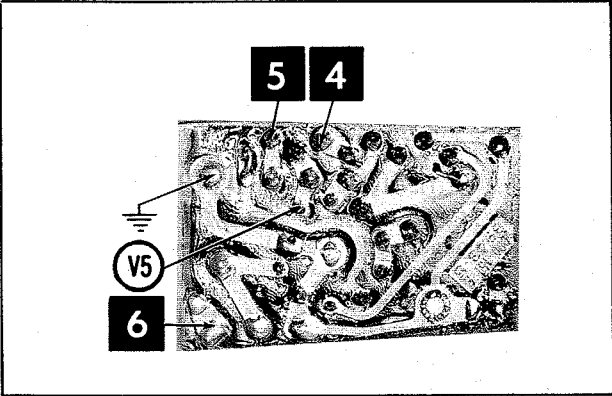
Stereo Preamplifier Printed Board, Bottom View.
